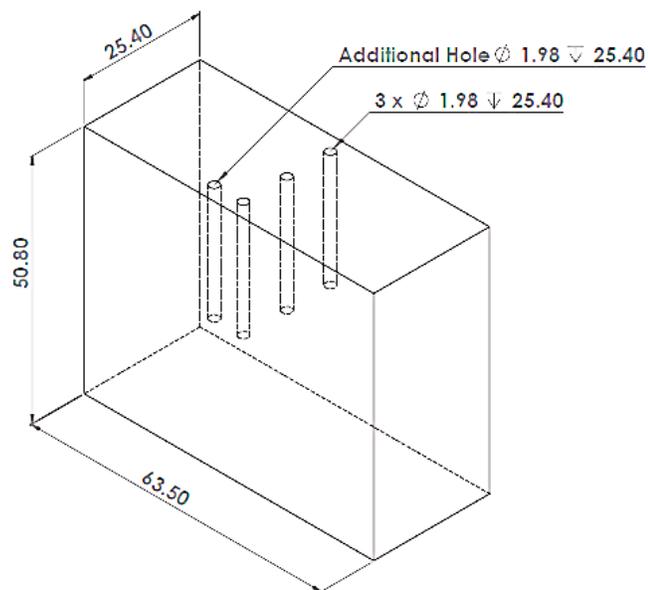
Drawing of Aluminum block (all dimensions are in mm) [2]
